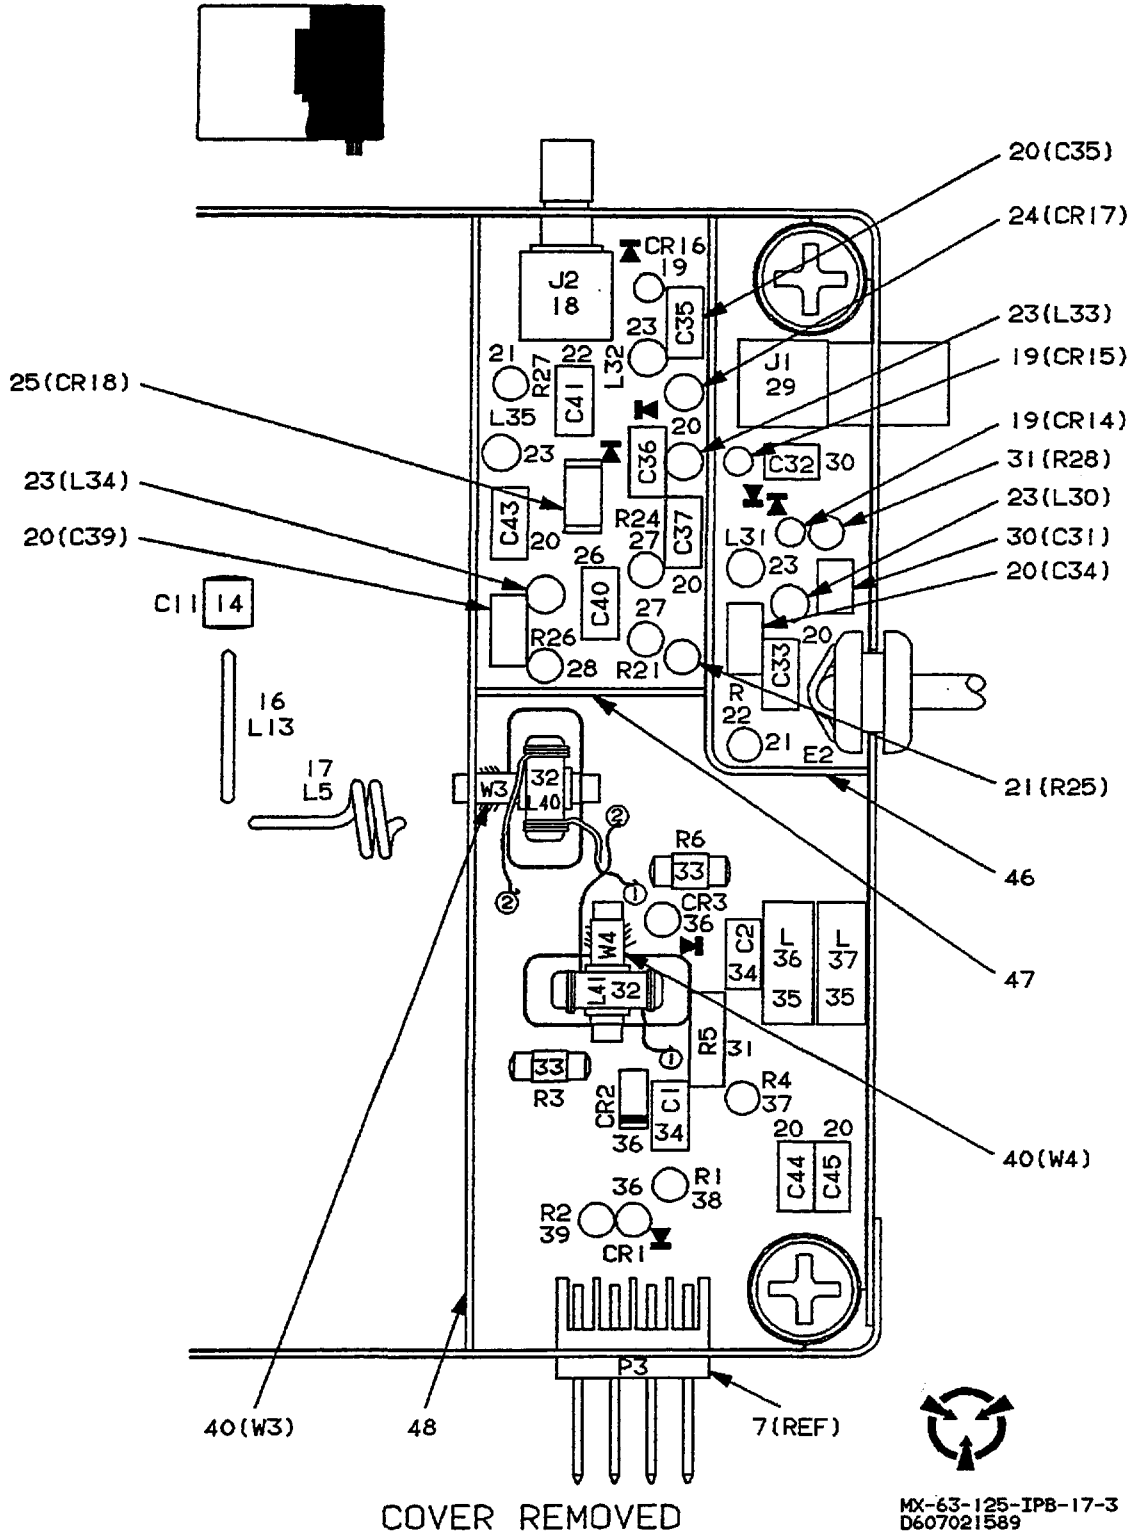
High Band Filter Module Assembly (Sheet 2 of 3)
